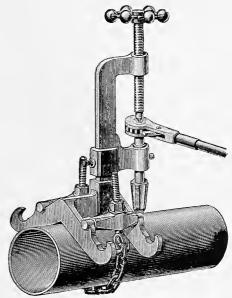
MUELLER GAS OR DRY MACHINE.
